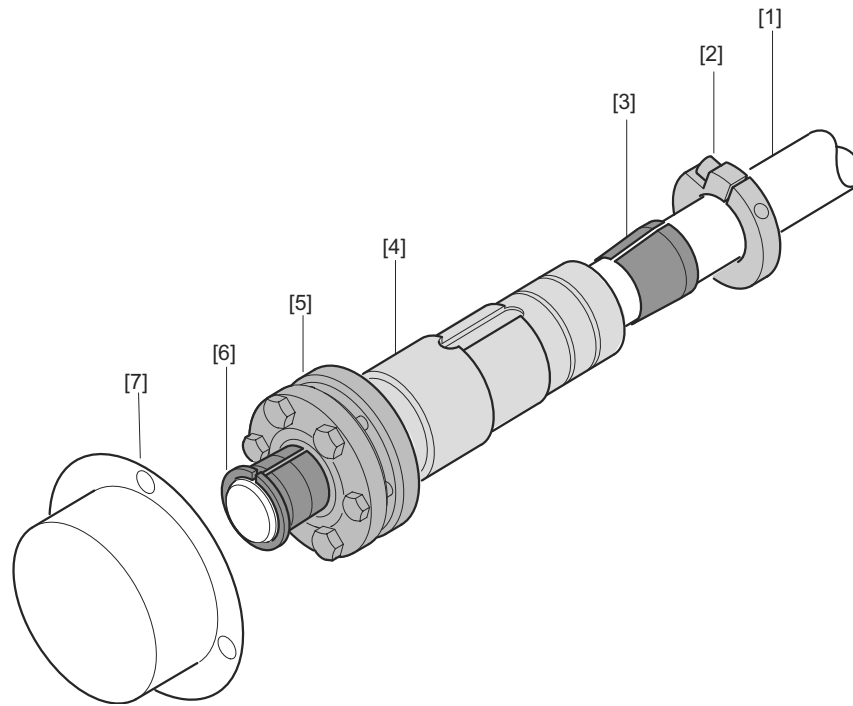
Components of the TorqLOC® hollow shaft mounting system
